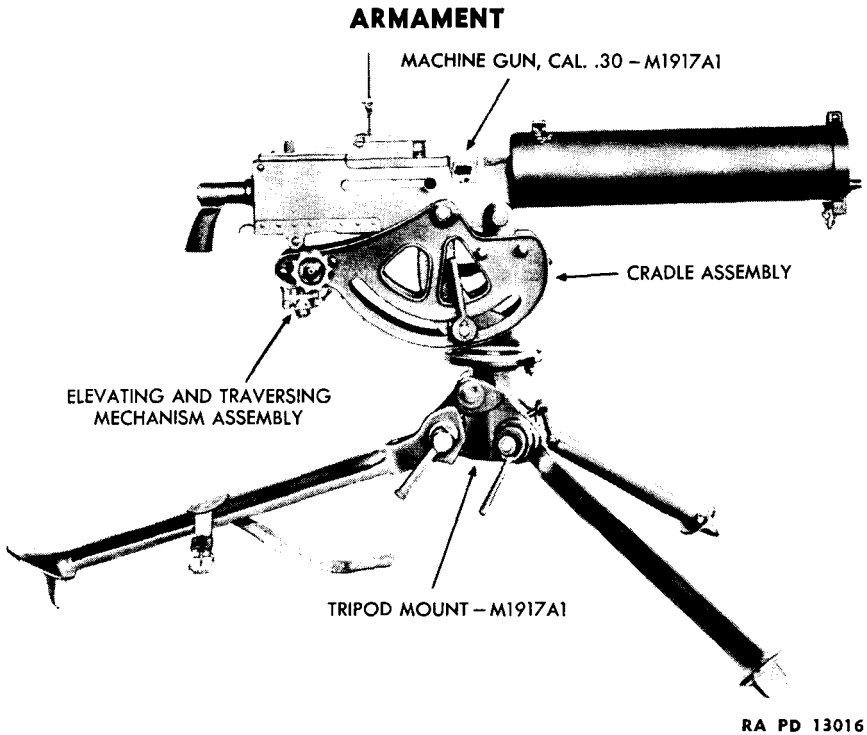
Browning Machine Gun, Cal. .30, M1917A1 on Tripod Mount, M1917A1
